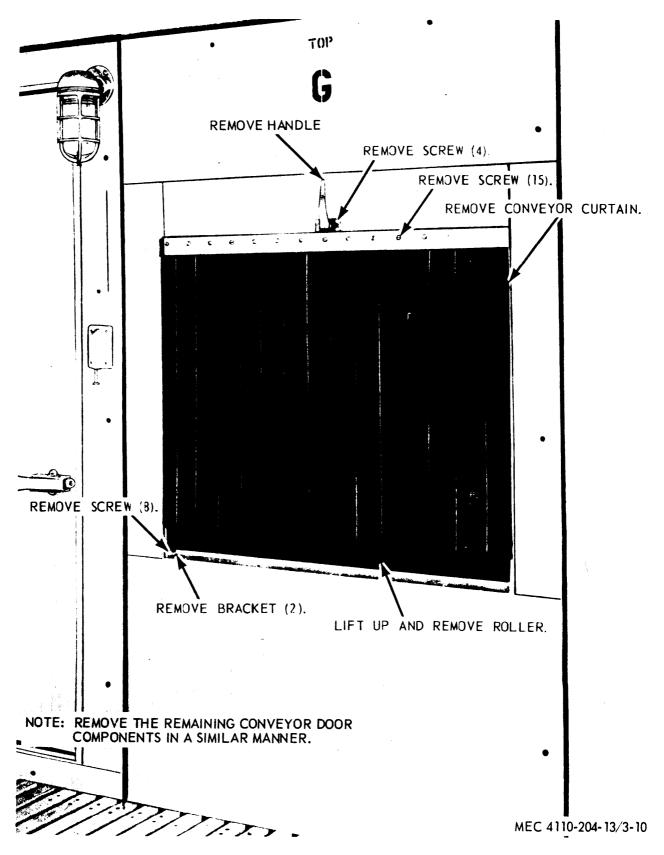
Conveyor door handle, rcller and curtain, removal and installation
